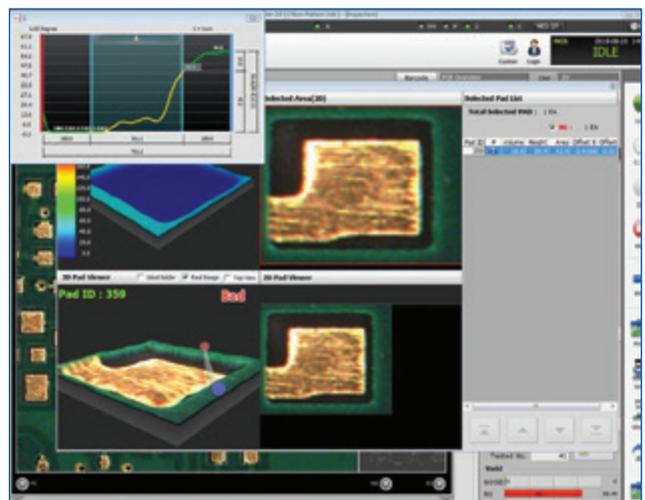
SPI screenshot showing solder mask taller than PCB pad, which prevents proper gasketing of the stencil to the board.
